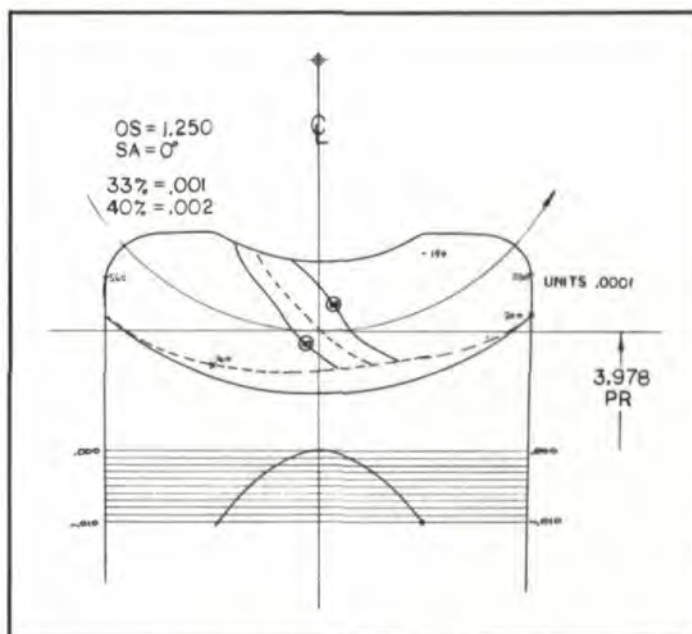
Map of one thread oversize hob. Three thread hob, two thread worm.
